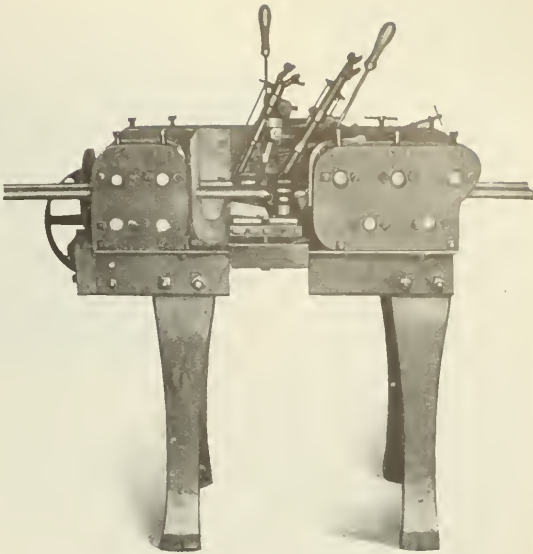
Automatic Seam-welding Machine for Tubes, which operates with Thermalene Gas
